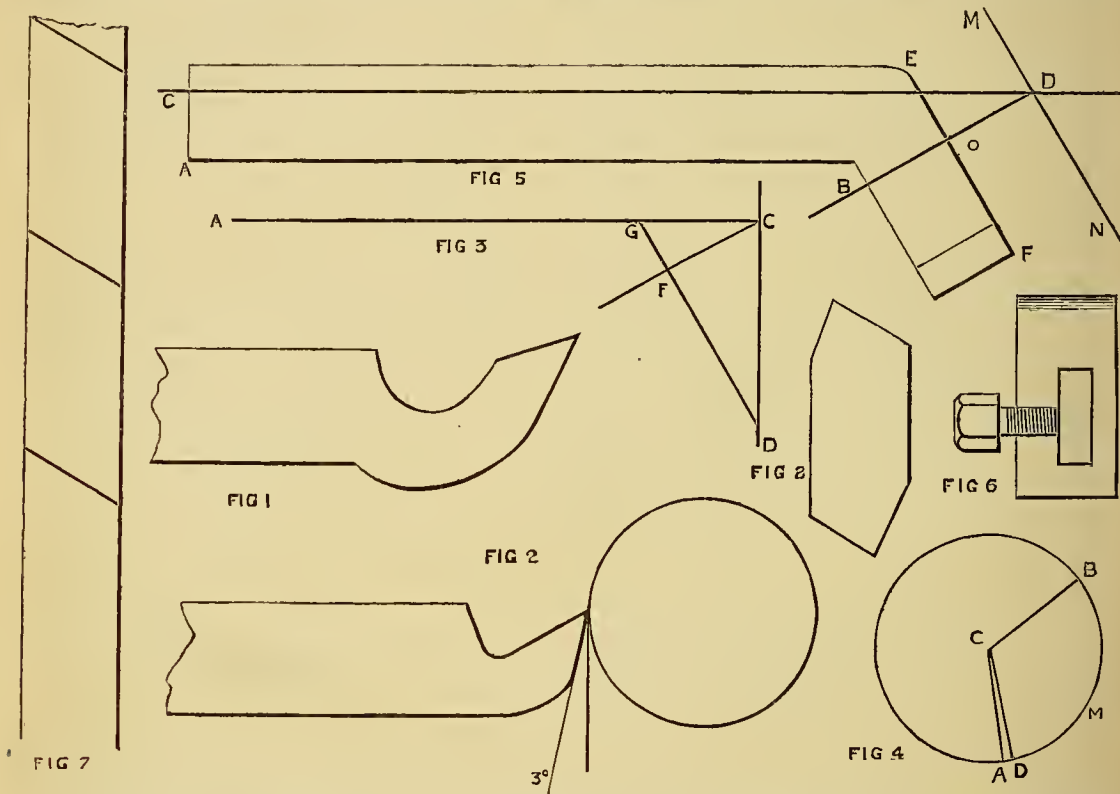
FORM OF BEST CUTTING TOOL. FIG. 2.—CLEARANCE OF TOOL. FIG. 3.—DIAGRAM ILLUSTRATIVE OF PLAN ON WHICH BAR IS MADE. FIG. 4.—TIN TEMPLATE. FIG. 5.—FORM OF BAR IN THE ROUGH. FIG. 6.—SET SCREW—END VIEW. FIG. 7.—STEEL FOR CUTTERS. FIG. 8.—FORMATION OF POINT OF TOOL AT ANGLE OTHER THAN 60° .
